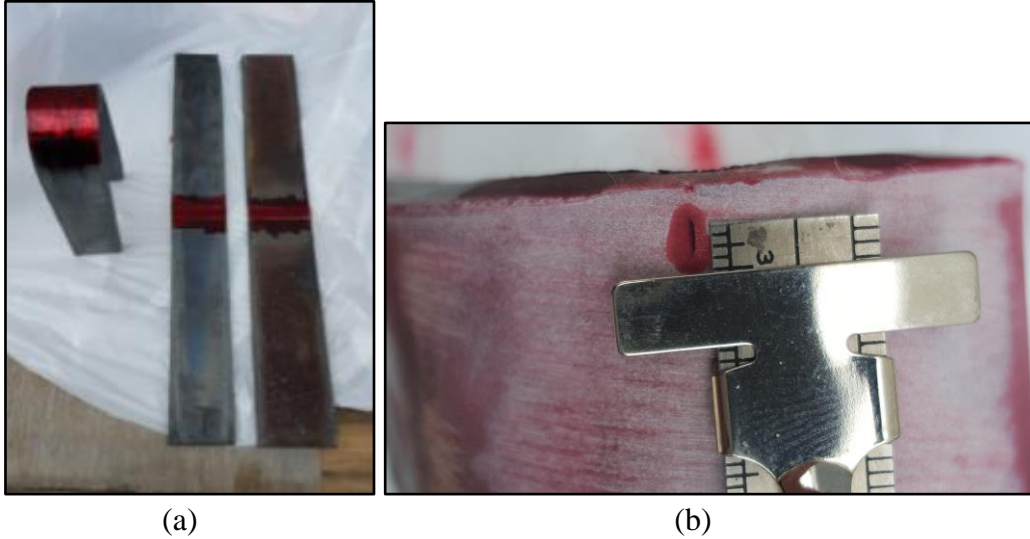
Dye penetrant inspection was performed on both bend tested specimen and specimen in the as welded condition, (a) application of the penetrant and (b) after applying the developer to aid in the discovery of cracks.
